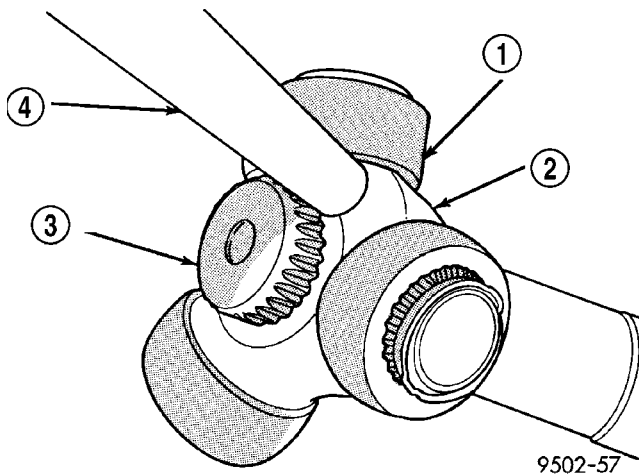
Installing Spider Assembly On Interconnecting Shaft
